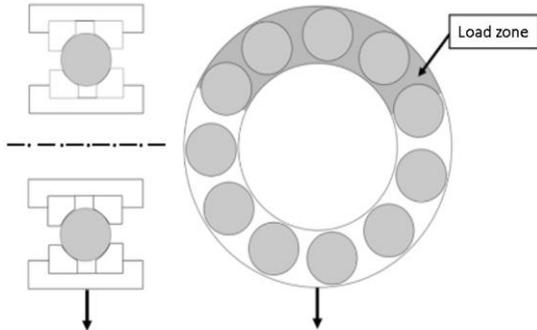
Bearing cross section under radial  $F_r$  load with a) loaded bearing rings b) load zone
